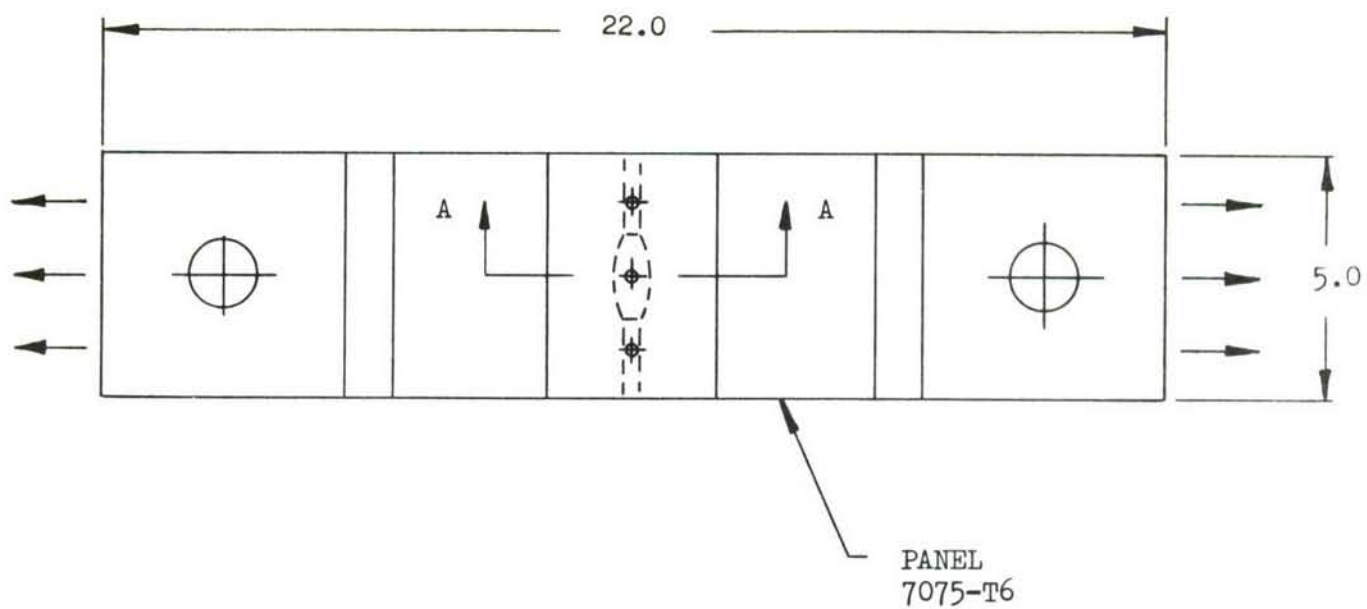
DAMAGE TOLERANCE SPANWISE SPLICE SHEAR SPECIMEN
